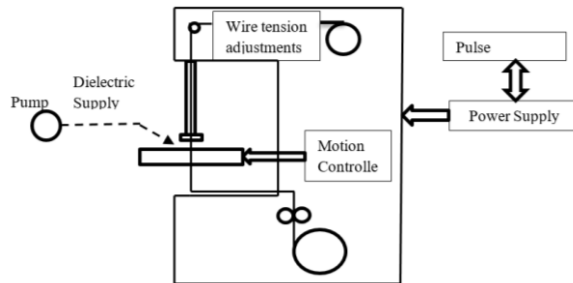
Schematic sketch of WEDM process showing wire feed mechanism
